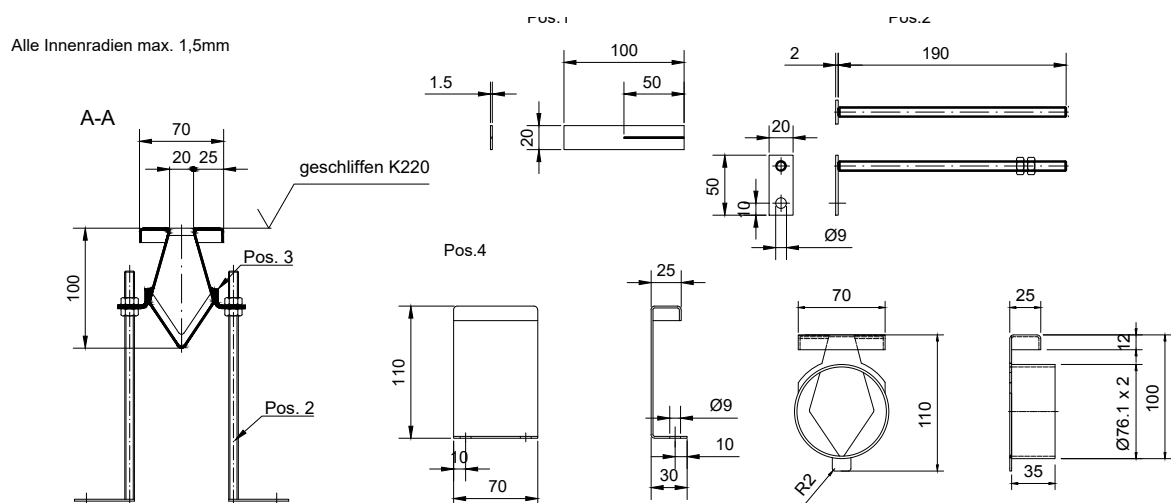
Drawing without welding explanation (Source: Picture drawing)
